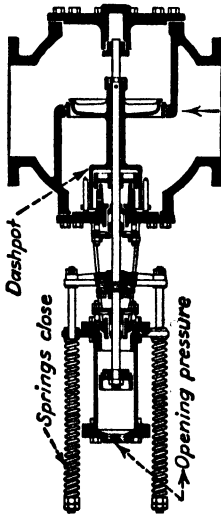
When valve is open, disk is free to slide on its spindle. (Courtesy of Davis Regulator Co.)
